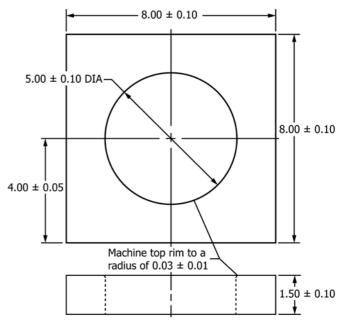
Typical Fixture with Open Hole (Inch-Pound Version)
